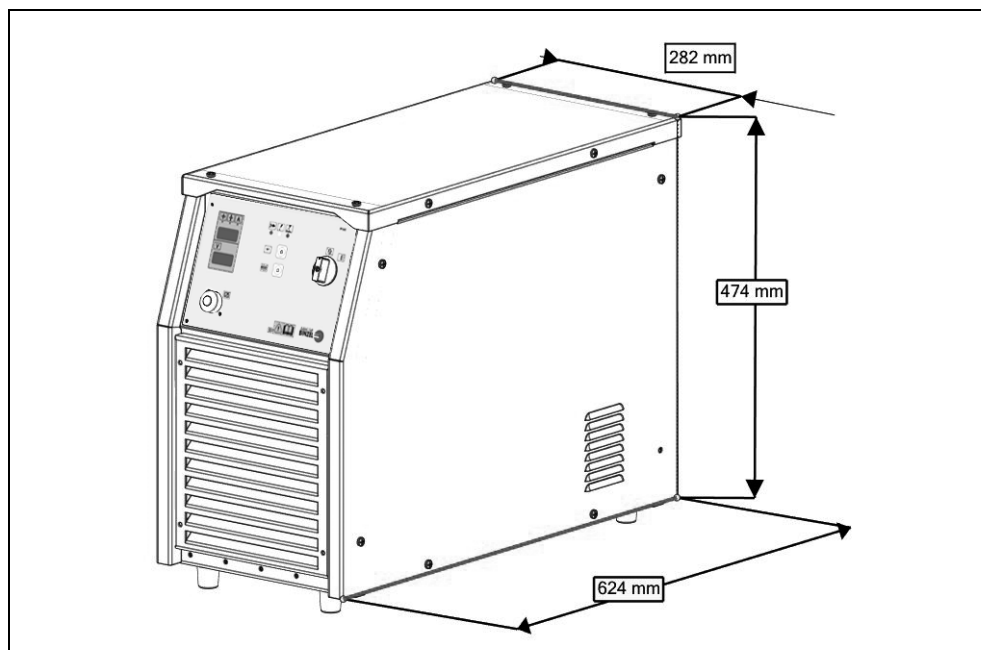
Dimension of the robot welding power source iROB
